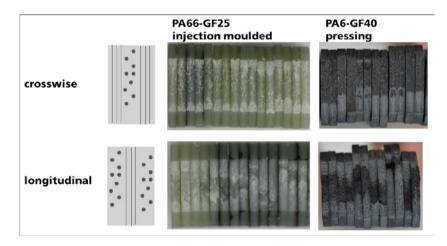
Rupture surfaces of the tested specimens with crosswise and longitudinal fibre orientation to the load direction
